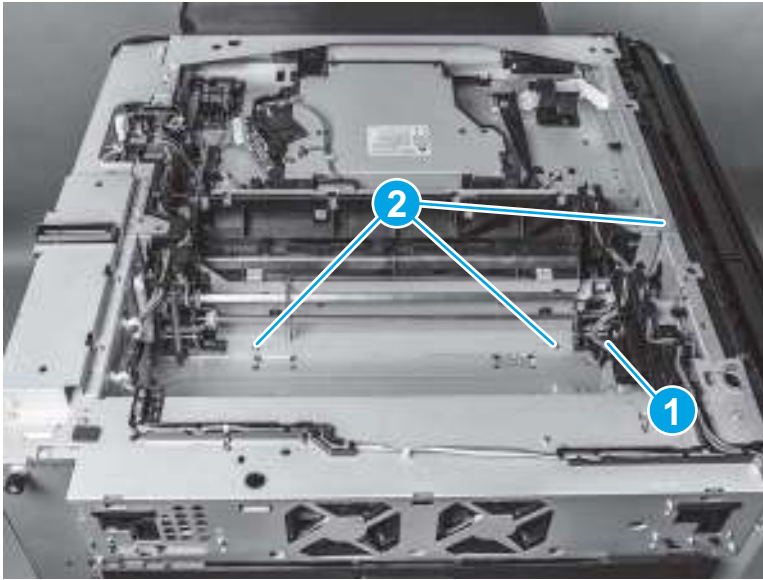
Remove the cartridge-lifter assembly (M830; 4 of 14)
